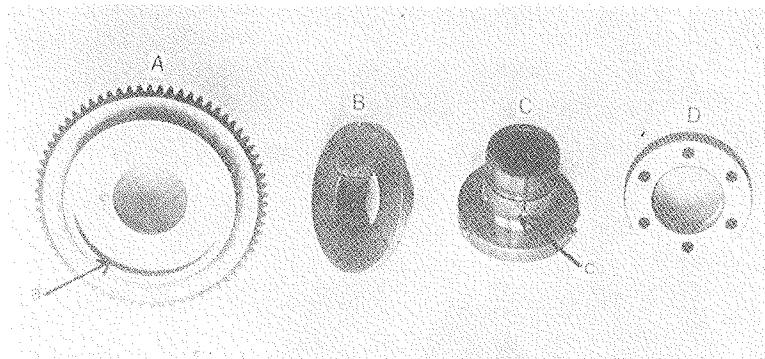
TIDE-PREDICTING MACHINE, DETAILS OF RELEASEABLE GEAR.
